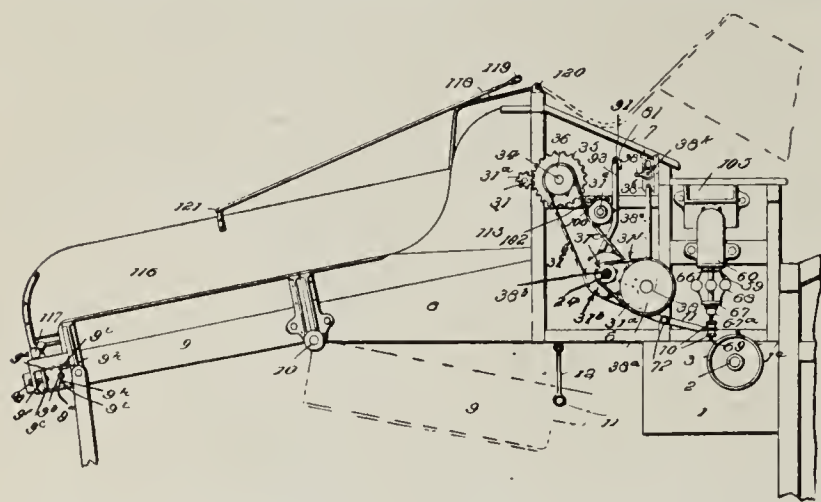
PATENT DRAWINGS OF THE RUTH FEEDER.
